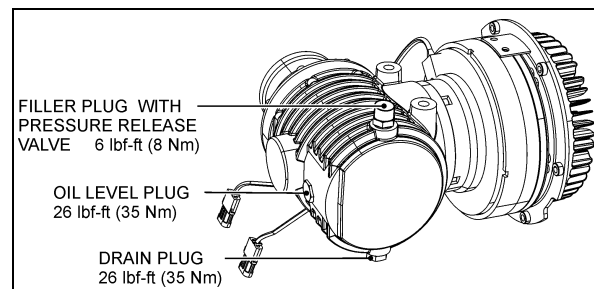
RIGHT ANGLE GEARBOX 05118
